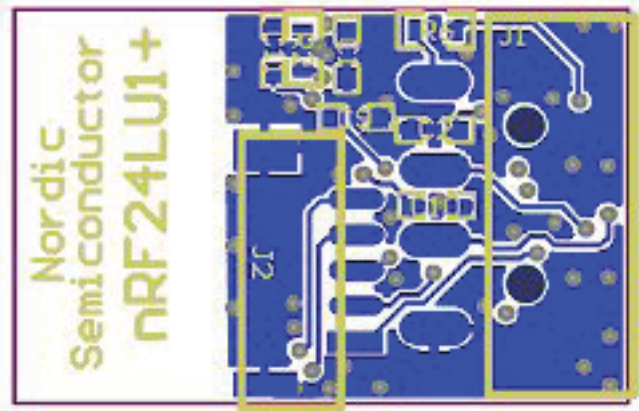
PCB layout ADNK-2083-ND24 Designer's Kit RF module
